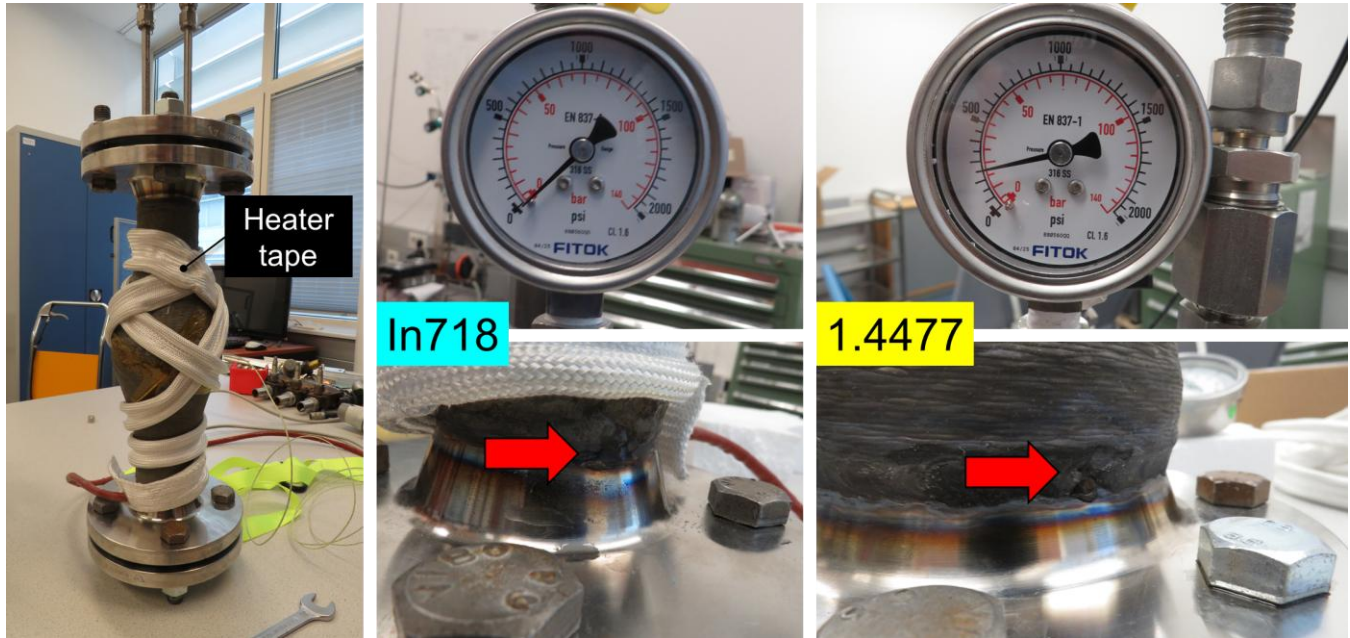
Summary of the pressure test on both demonstrators using water. Red arrows indicate leakage spots, which are mainly located at weld seams.
